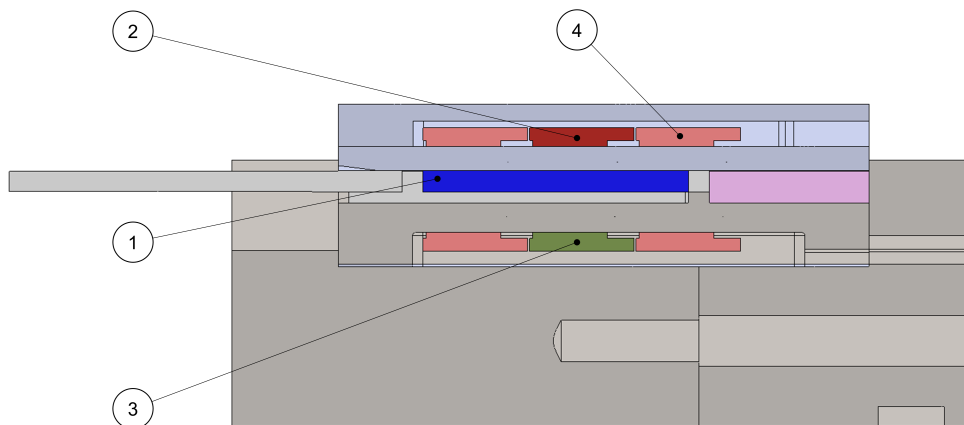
Half-section view of the metal forming system ©2021 Chair of Metal Forming
